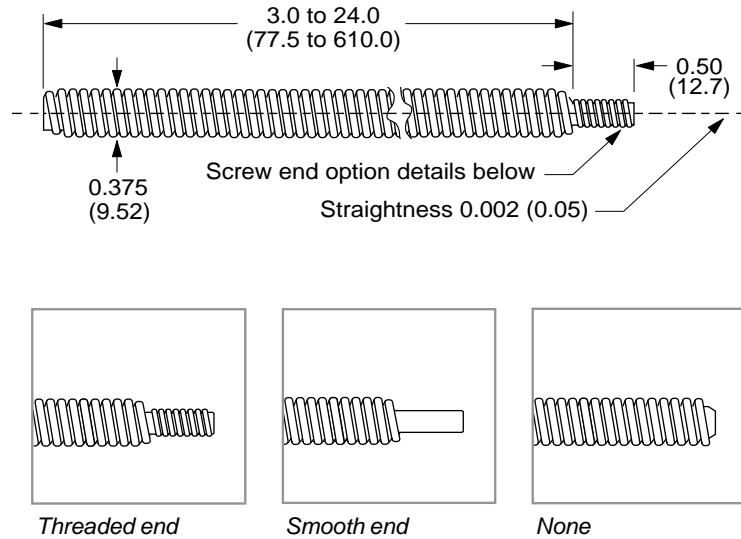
Linear Actuator screw specifications [inches (mm)]
